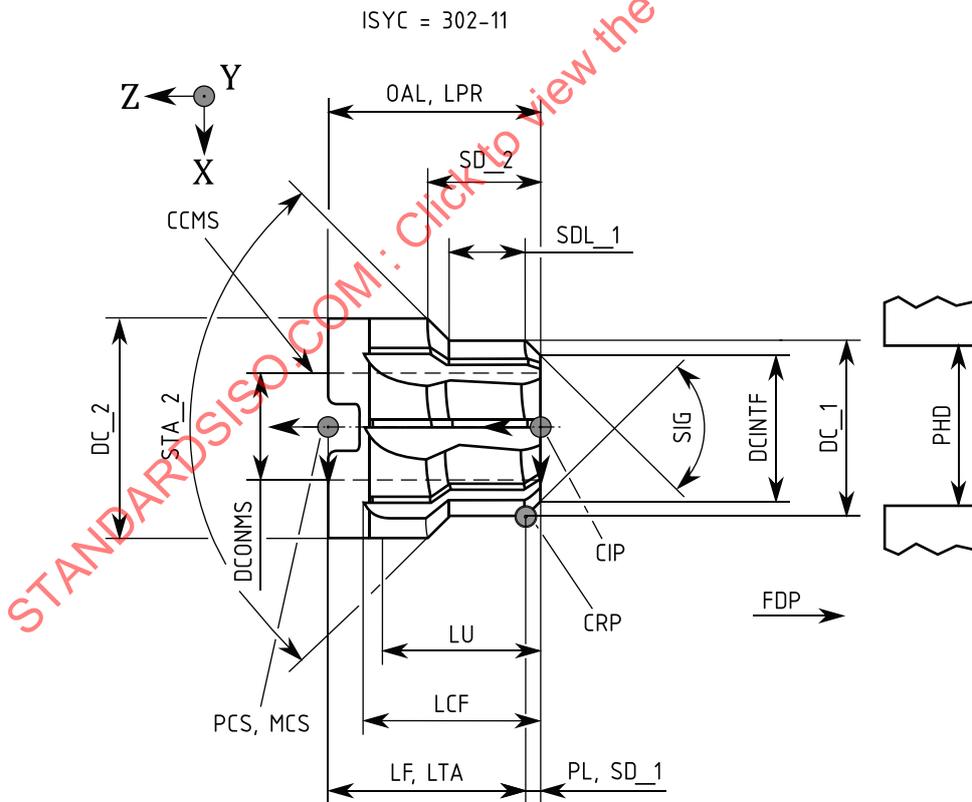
ISYC 302-11 - Stepped shell countersinking tool, top solid
